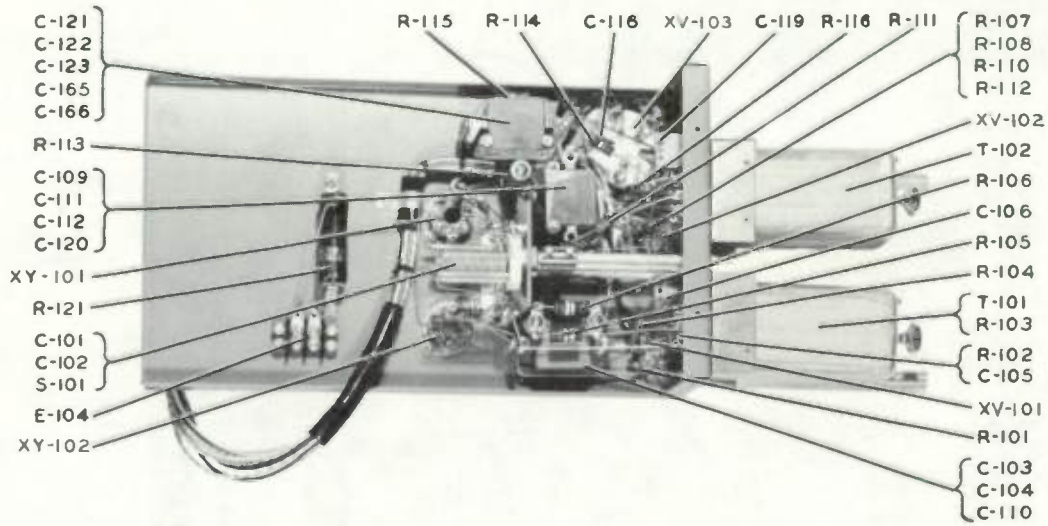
Driver Cabinet R-F Chassis, Bottom View
